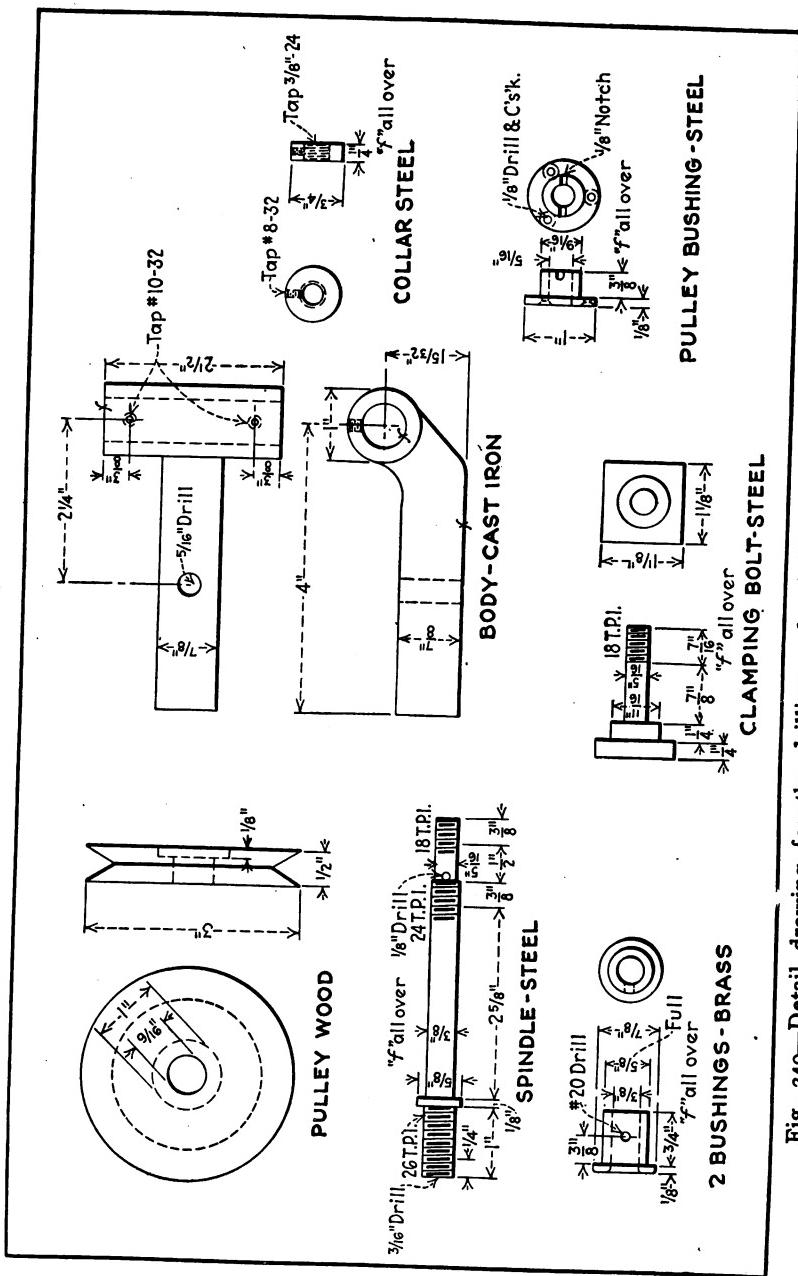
Detail drawing for the drilling and grinding attachment shown in Fig. 239
